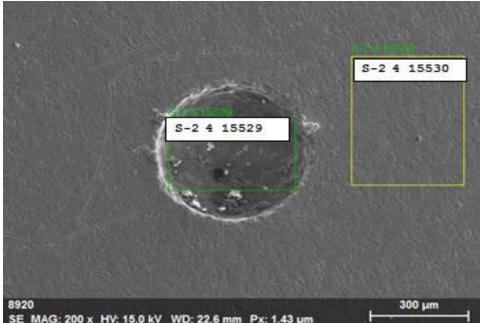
EDS Analysis of Hole no. 6 (Best Hole)
